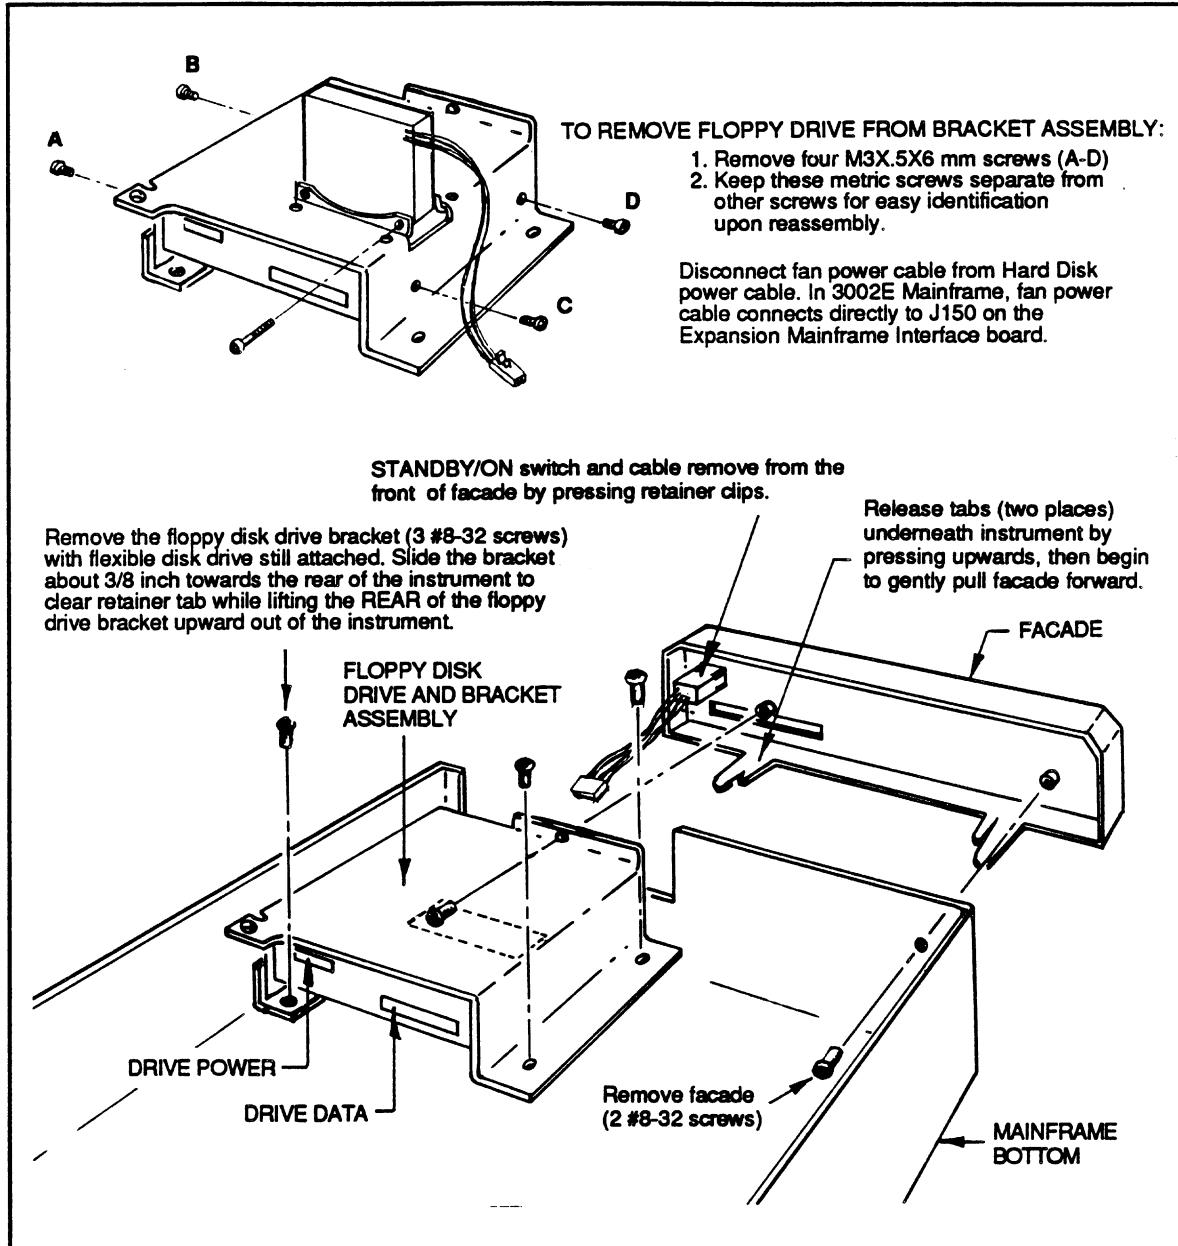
Removing the Floppy Disk Drive and Auxiliary Fan.
